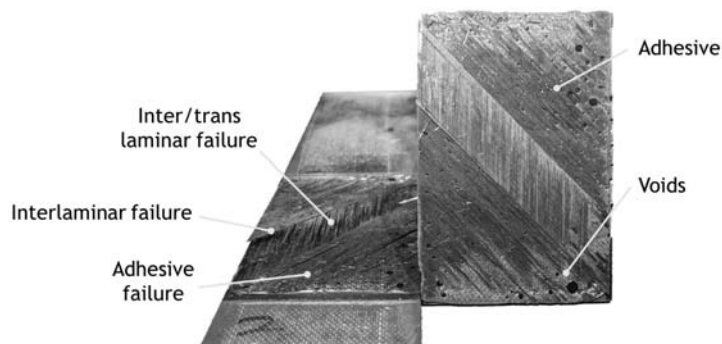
Typical fracture surface of the specimens A, B and C.
